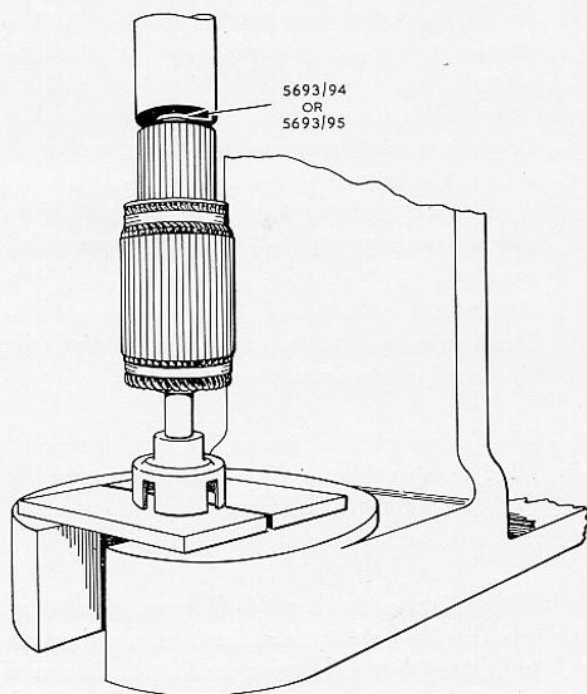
PRESSING CLUTCH OUTER RACE ON ARMATURE SHAFT
